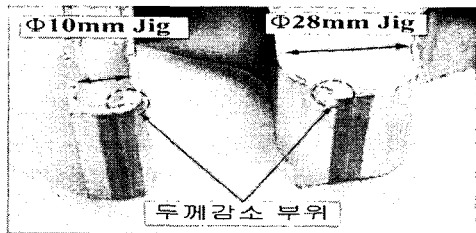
Appearance after the guided bending test for Lap-jointed specimen
